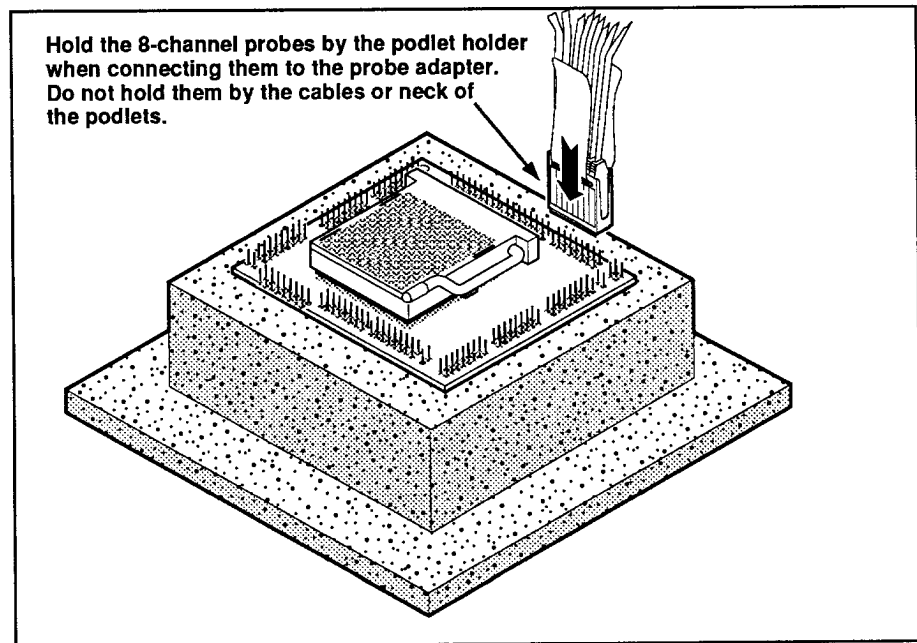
Connecting clock and 8-channel probes to the probe adapter.
